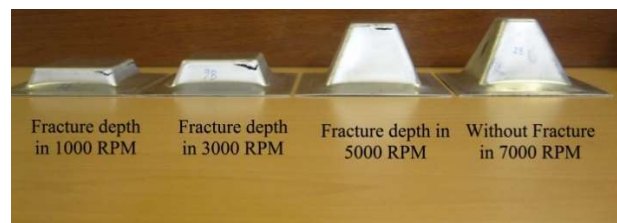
Formed parts for fracture depth determination at different tool rotation speeds
